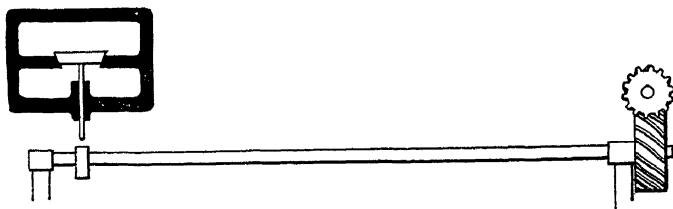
VALVES OPERATED BY SPIRAL GEARING.
